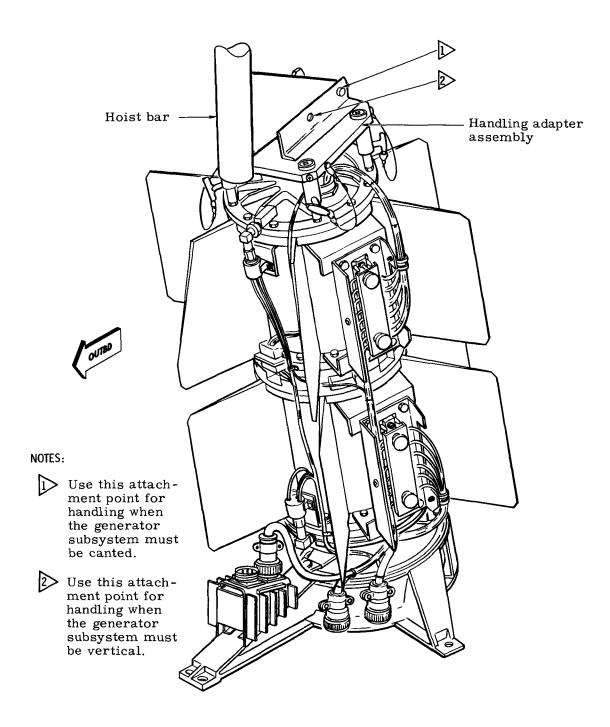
HANDLING ADAPTER AND OFFSET HOIST BAR INSTALLATION
